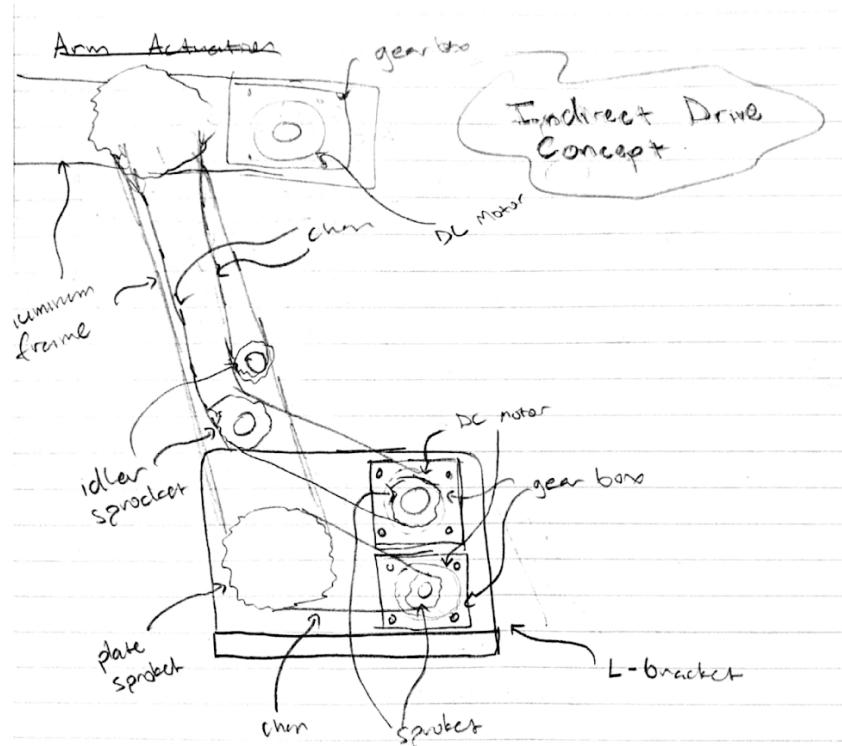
Sprocket Driven Arm Joints with Gearbox Reduction
